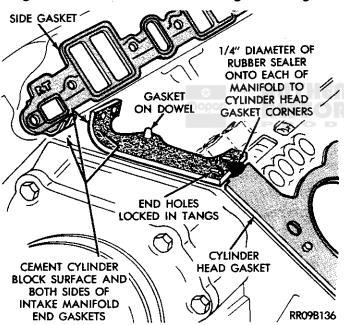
Intake Manifold END Sealing – 5.2L/5.9L Engines
